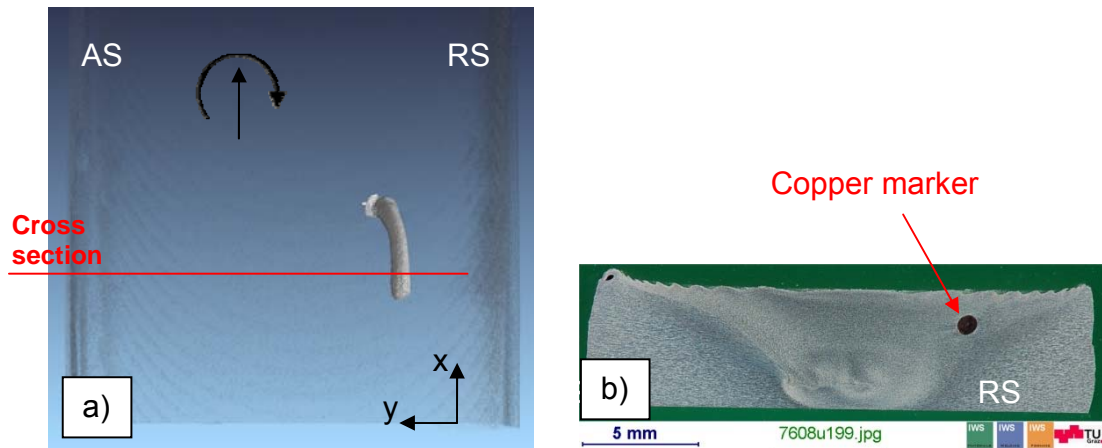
3D CT image of copper marker P002C after welding a) and macrograph of cross section showing marker P002C b)
